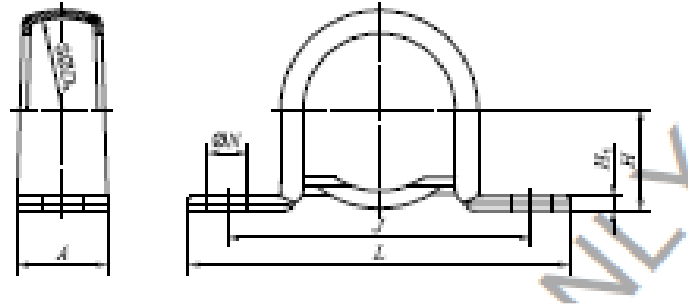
PRESSED PLUMMER BLOCK HOUSING
